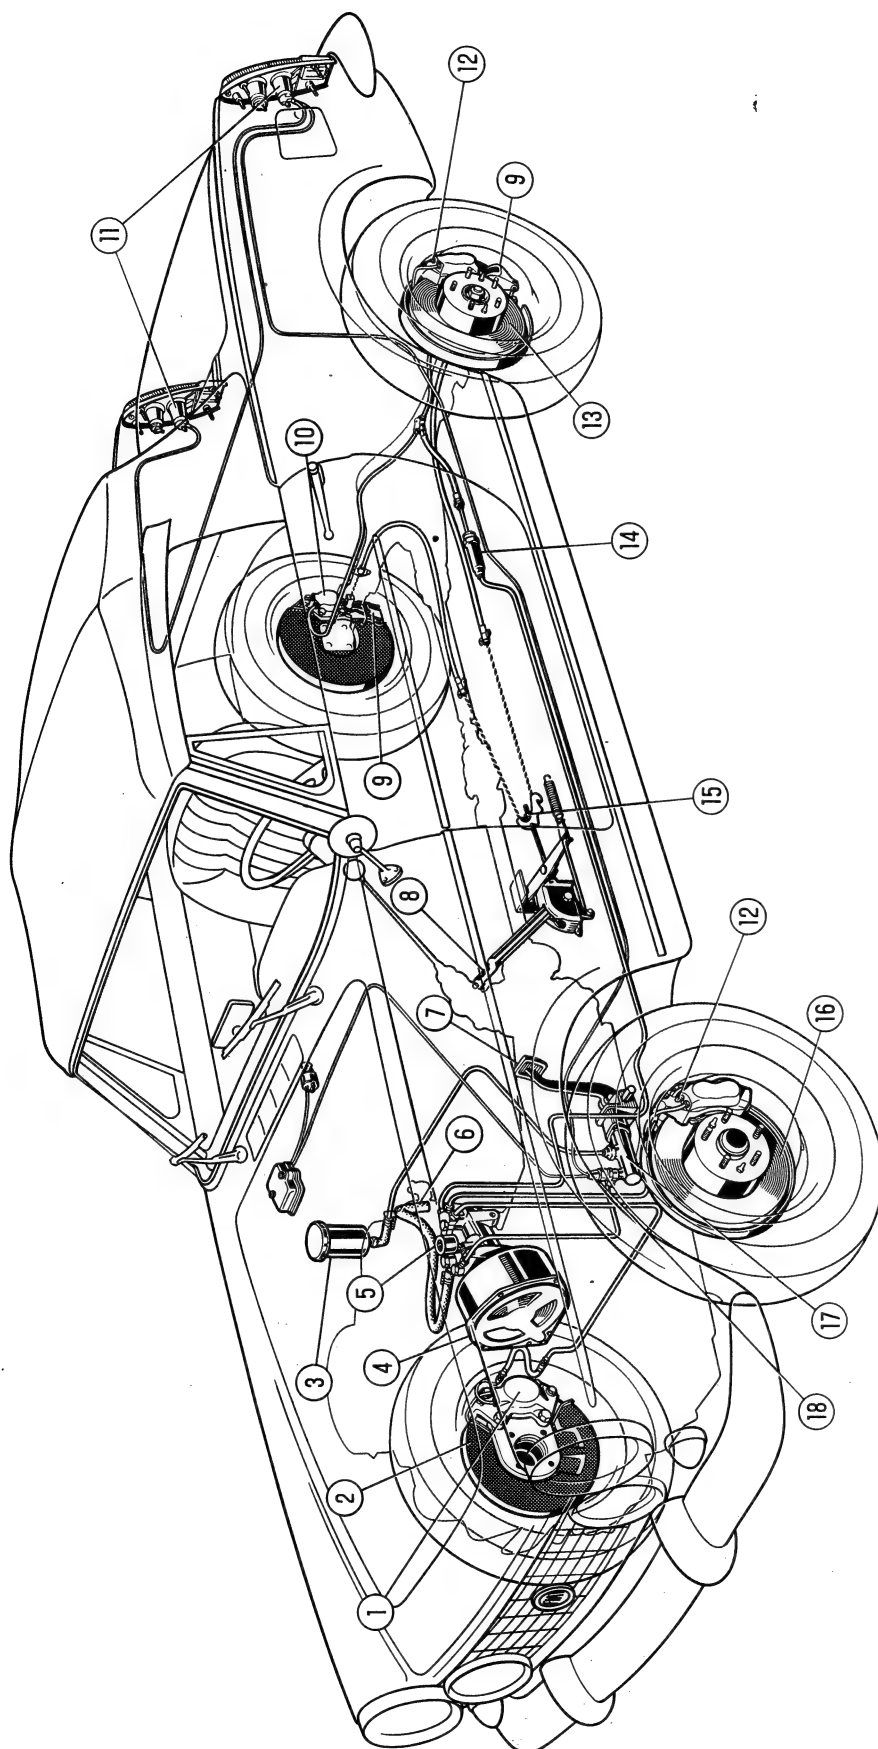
Service and parking brake system diagram - 1600 S Cabriolet.
